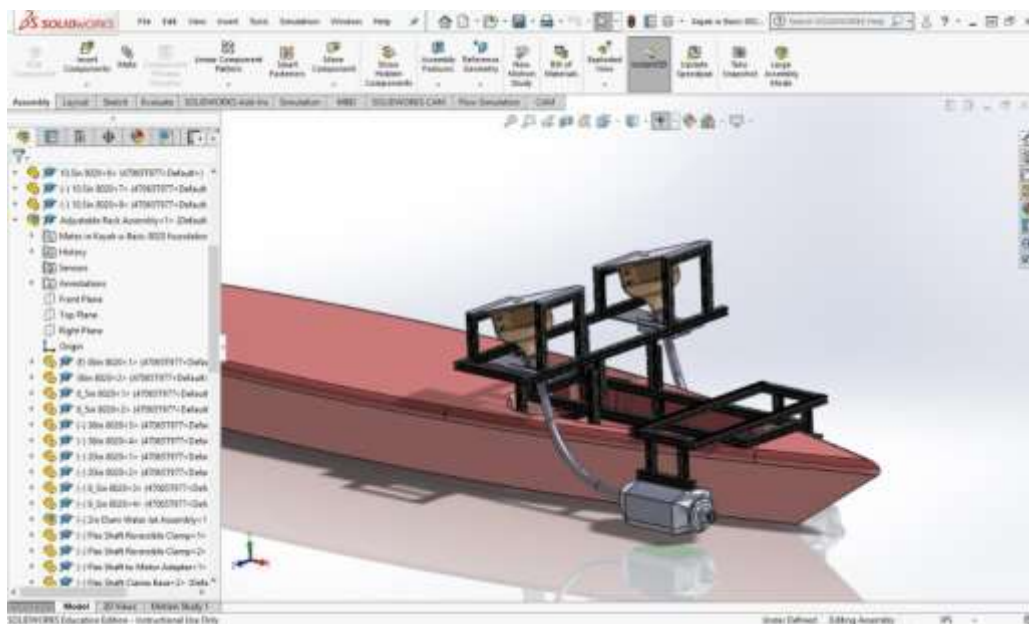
Model of initial mounting scheme. Flex shafts required the motor to be mounted at an odd angle.
